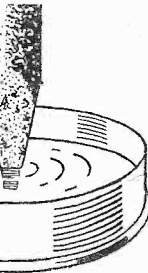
To tin the iron dip the point in non-corrosive soldering fluid after heating.
